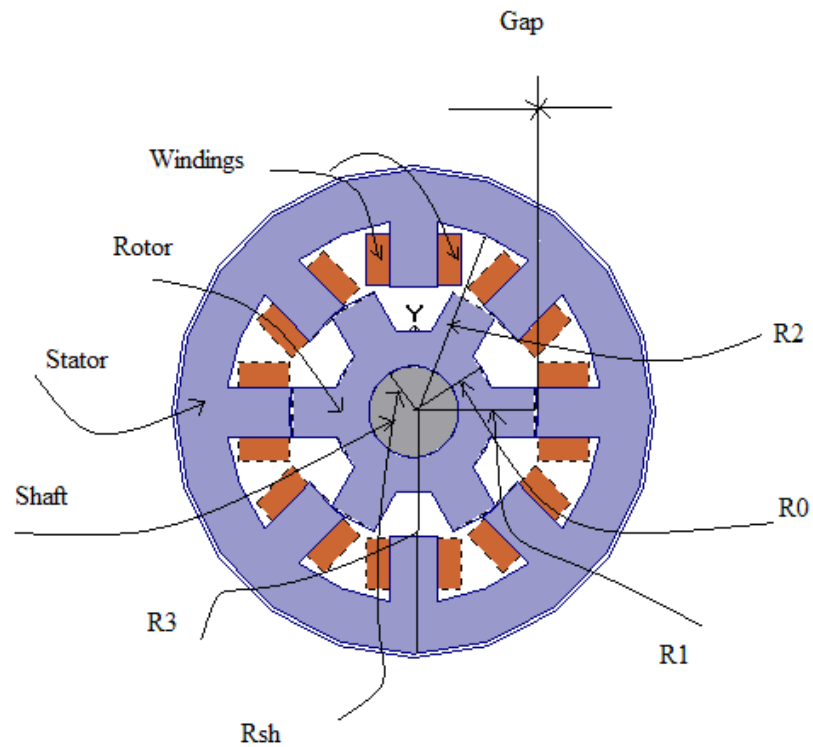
Cross-sectional geometry of the 8/6 SRM and respective dimensions.
